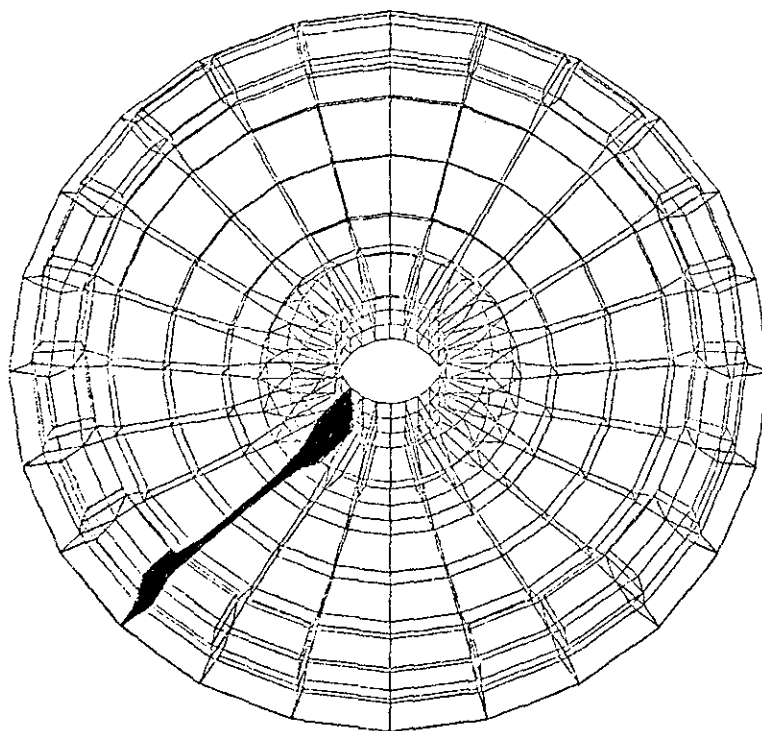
VIEW OF A 33 INCH WHEEL WITH ONE COMPLETE RADIAL CRACK - ANSYS GEOMETRY
